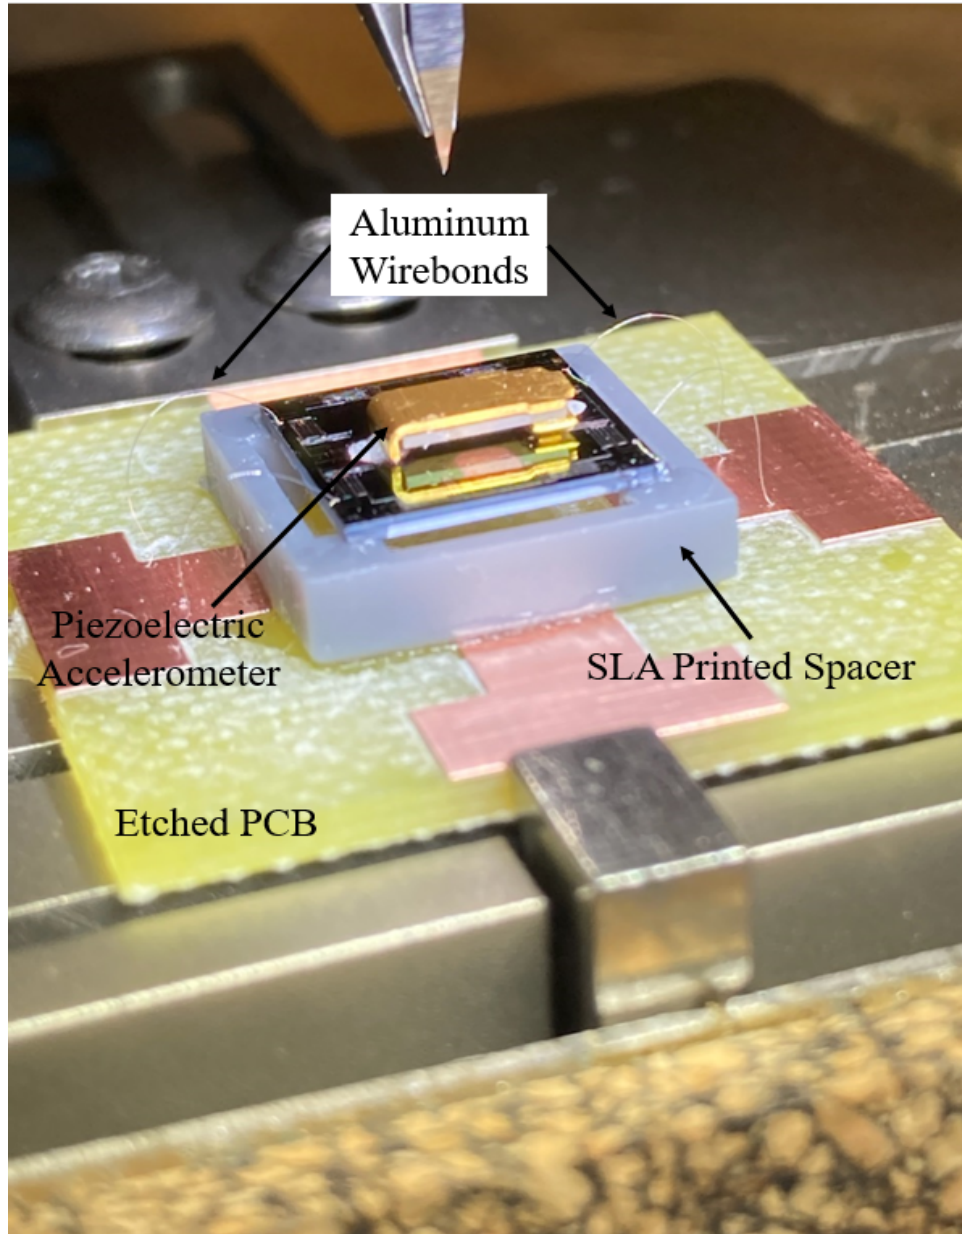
Integration setup with piezoelectric accelerometer on I3 MVI. An SLA printed spacer separates the accel/iso combo from the etched PCB to which the isolator output is wirebonded.
